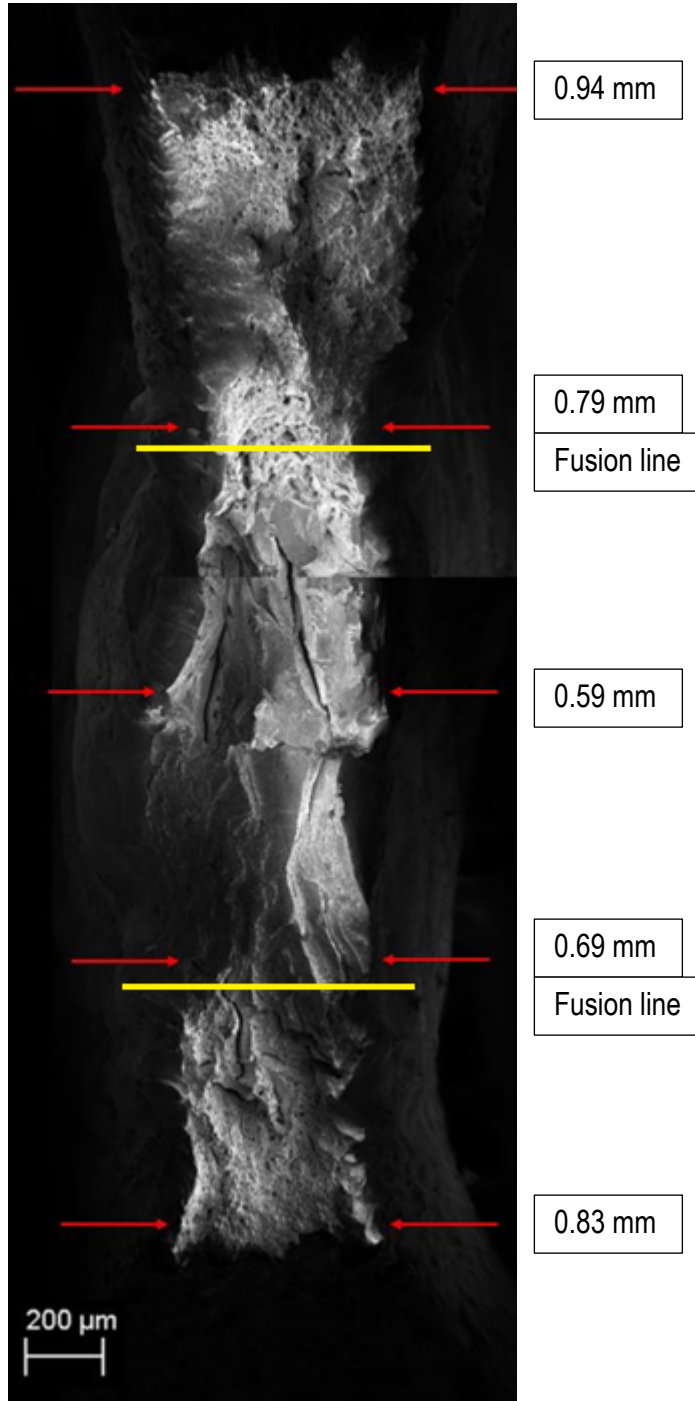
Scanning electron micrograph of the fracture surface of a tensile coupon machined from a Grade 436 weld that had 30% weld metal in the tensile gauge width. The shape of reduction in area is indicated by dimensions, the fusion line and columnar-to-equiaxed transition was added as indicated. (Weld ID: AA19010, with a pulse frequency of 15Hz, an electrode taper angle of 30°, peak welding current of 190A and a welding speed of 10 mm/s. The sample had a 180 μm average grain size and a 29% elongation). Magnification: 80x
